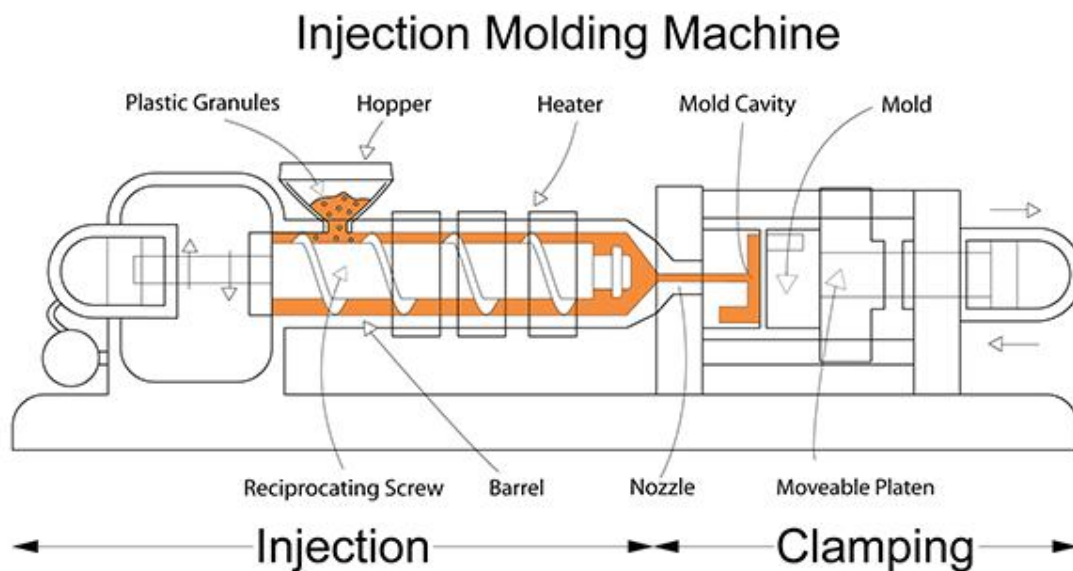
Injection molding machine schematic apparatus. Pellets are fed by a hopper into a heated barrel that mixes and injects melted materials into a mold. [28]
